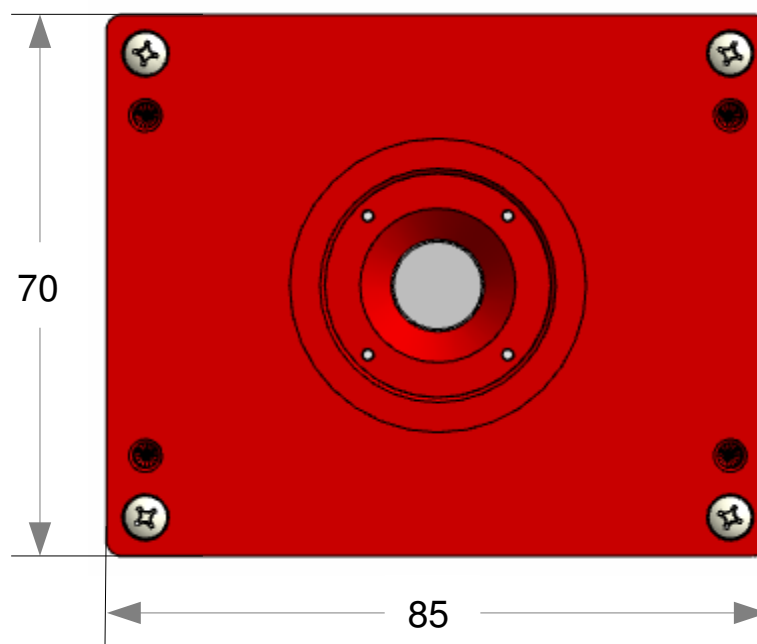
Dimensions of camera (front view). Dimensions in mm.
